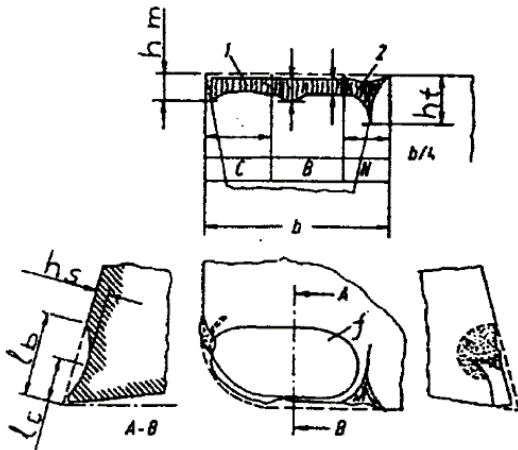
Cutting edge wear parameters and designations, where: C, B, N – wear areas; l_b – length of wear hole; l_c – distance to the center of the wear hole; h_s – depth of the wear hole; h_m – flank wear; h_t – shock load wear; f – dimple wear form. [19].
